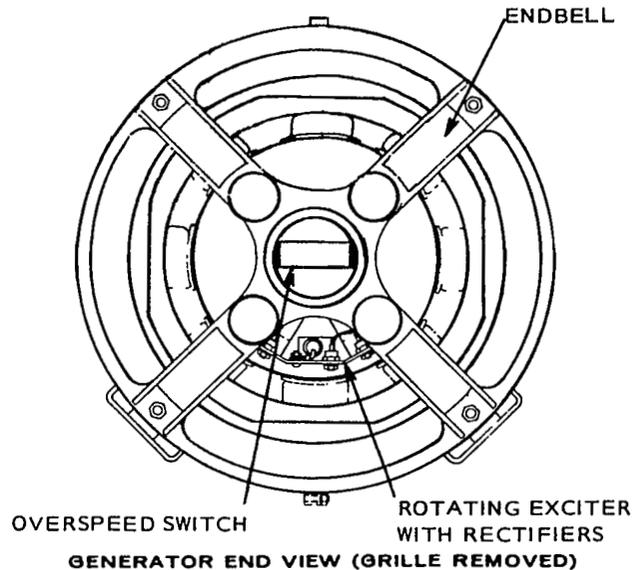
ROTATING RECTIFIER ASSEMBLY
